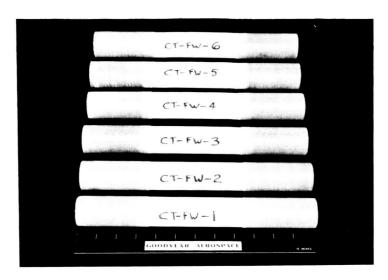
Filament-Wound Tensile Cylinders Ready for Metal Sleeve
